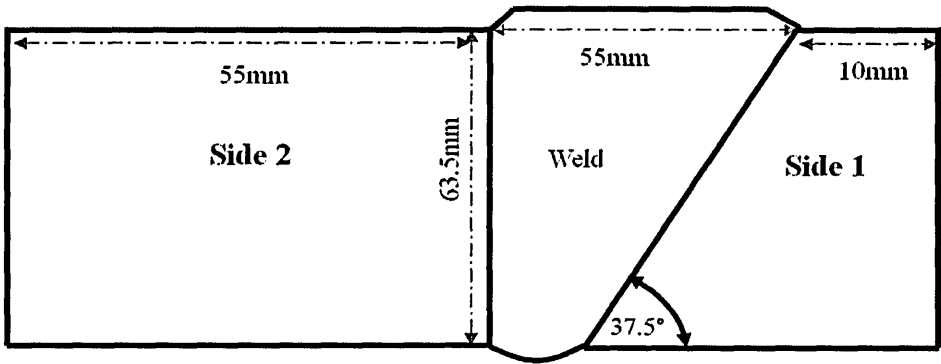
Weld geometry of Type 316H stainless steel weldment (Weld-3).
